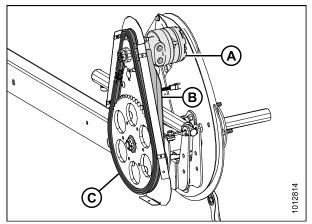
Single-Reel Drive Shown – Double Reel Similar
